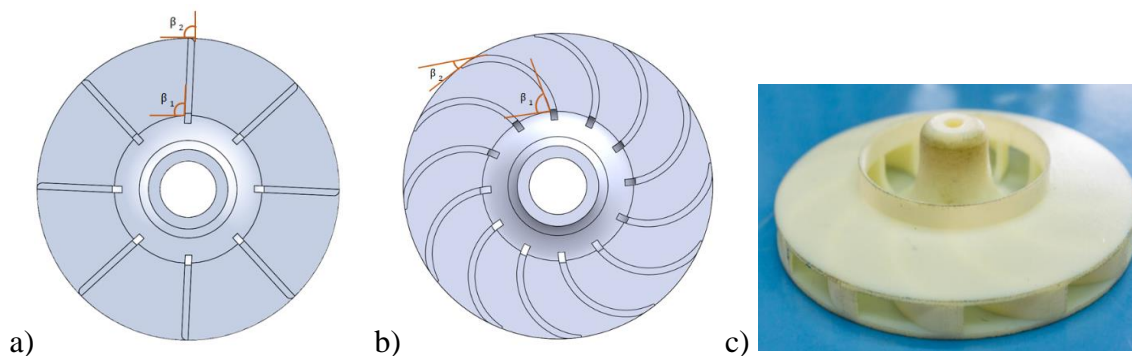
Investigated wheels – a) radial blades, b) backward blades, c) a wheel manufactured by 3D printing technology
